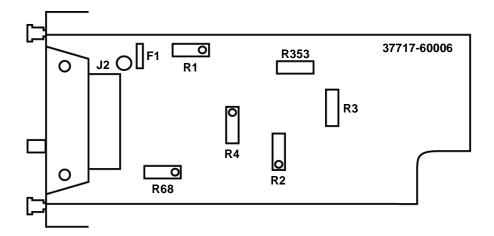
A6 Jitter Rx Module Adjustable Components
